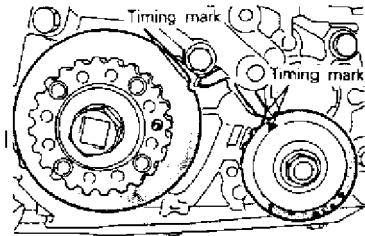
Crankshaft, Oil Pump Sprockets Timing Marks
